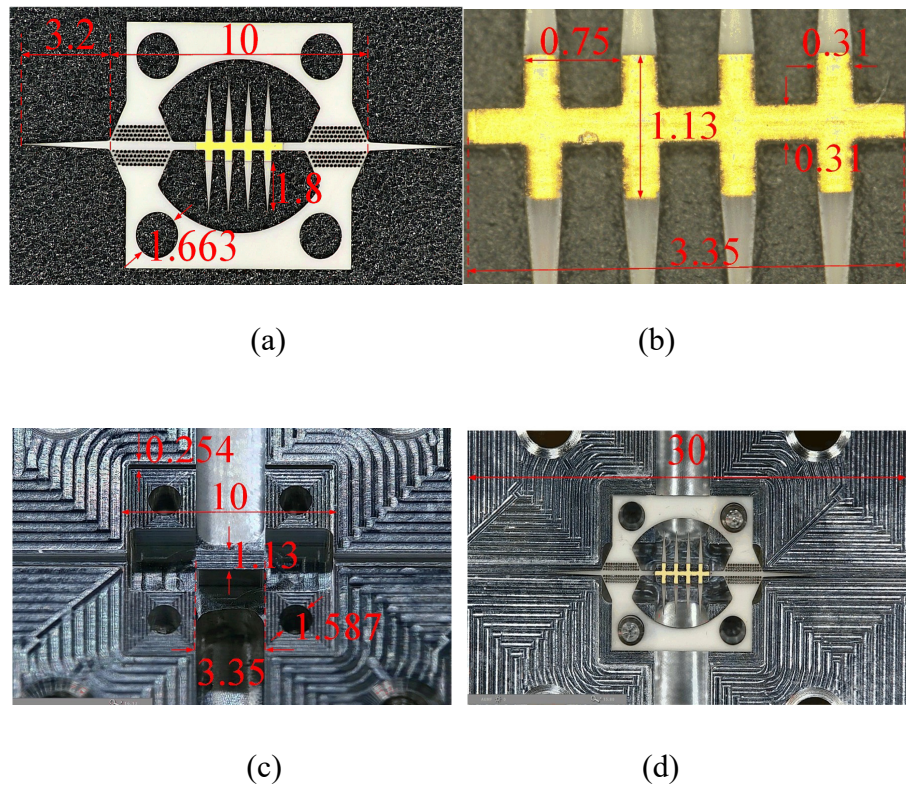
(a) Experimental prototype of two-port device with four intersections, (b) dimension details, (c) cover of aluminum housing for measurement, (d) assembled with the base of aluminum housing. Unit in mm
